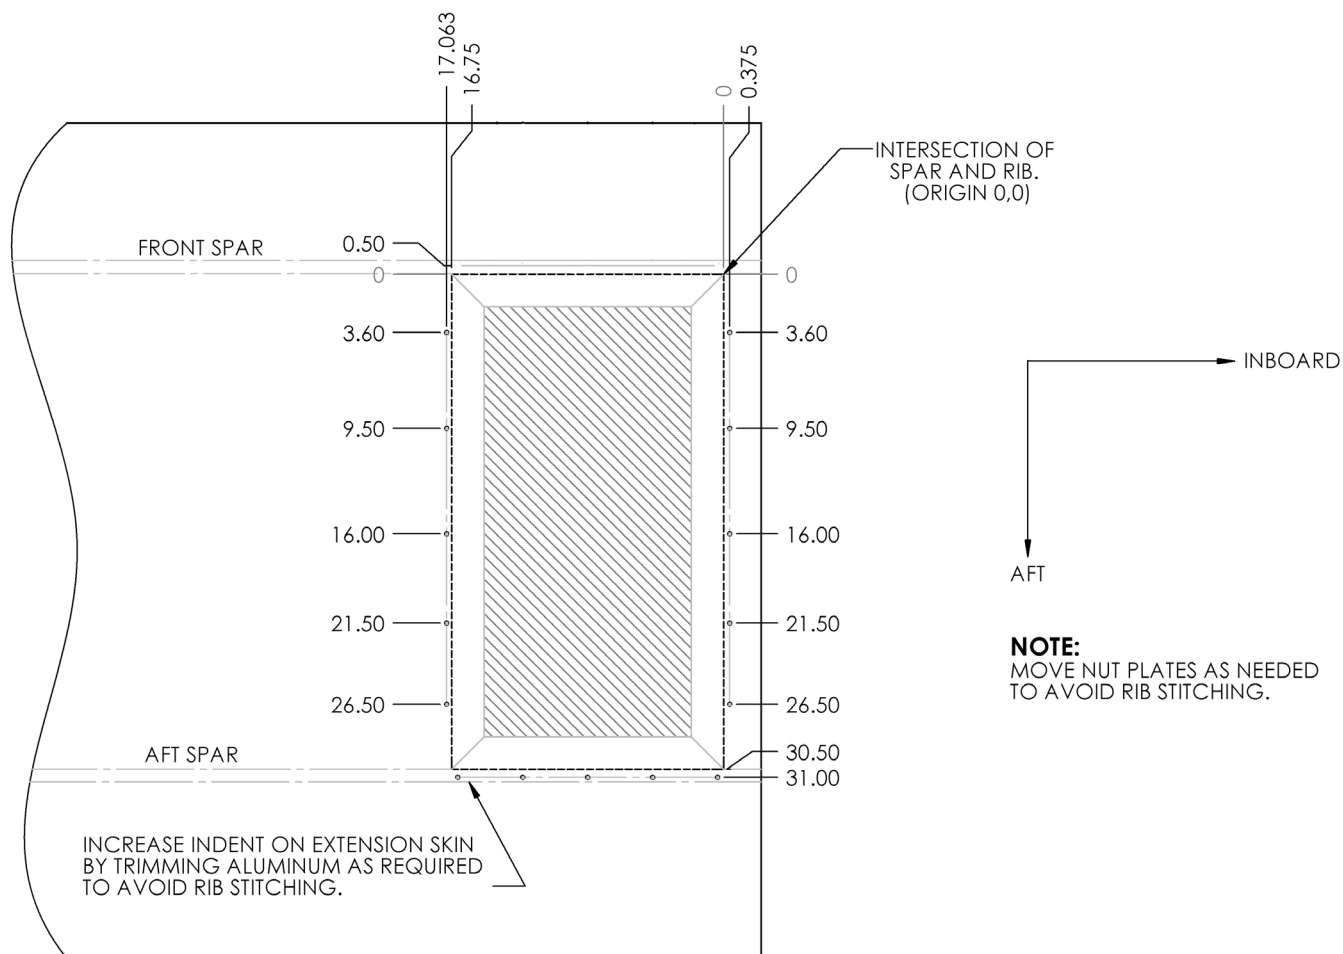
Tank Bay Hole Locations (All Tolerances within 1/8”)
